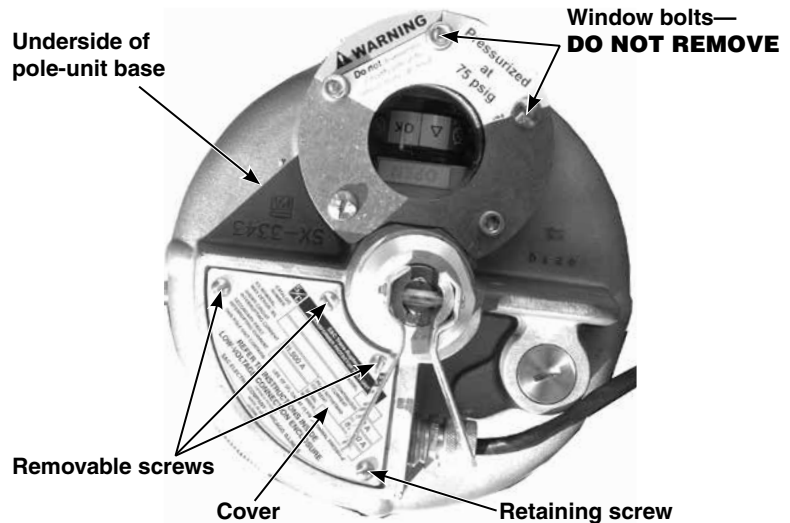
Remove the three removable screws at each pole-unit electrical junction box cover. Loosen the fourth retaining screw.
